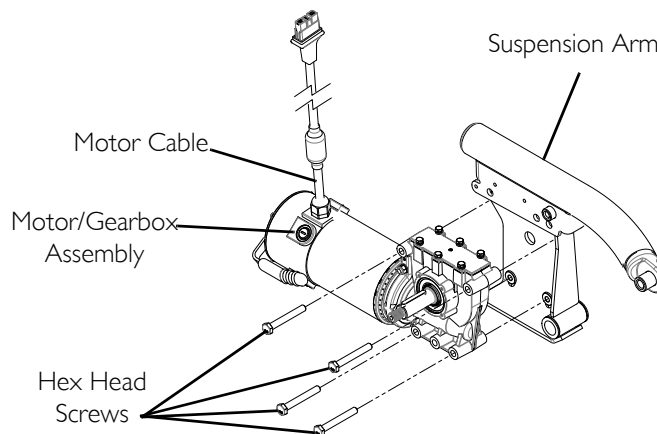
Removing/Installing the SSD Motor/Gearbox Assembly
